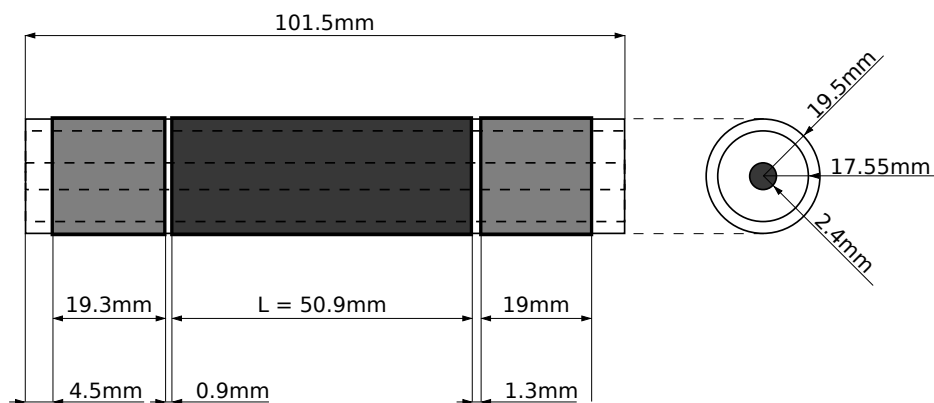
Drawing of the coaxial capacitance probe with its dimensions.
